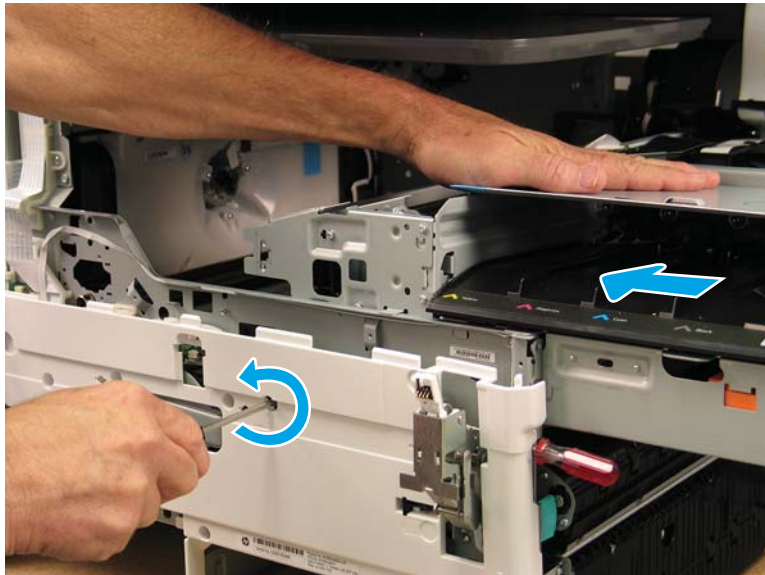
Engage the wiper engagement racks from the drive wheels
